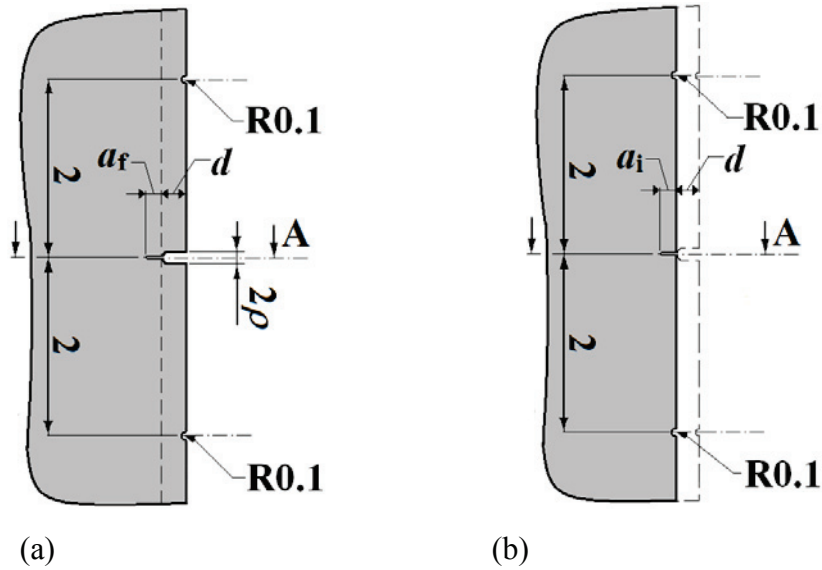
(a) Crack initiated at root of starter notch, end of stage ‘i’ (b) Cracked specimen after machining away the starter notch, beginning of stage ‘p’.
